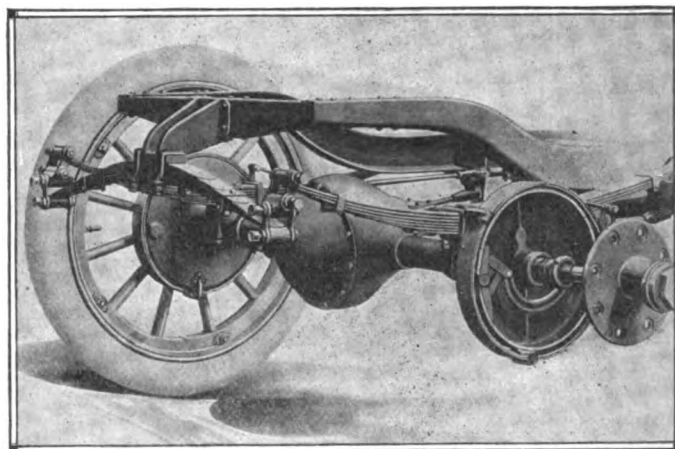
View of the rear construction of the Havers, showing platform spring suspension and rear axle design
